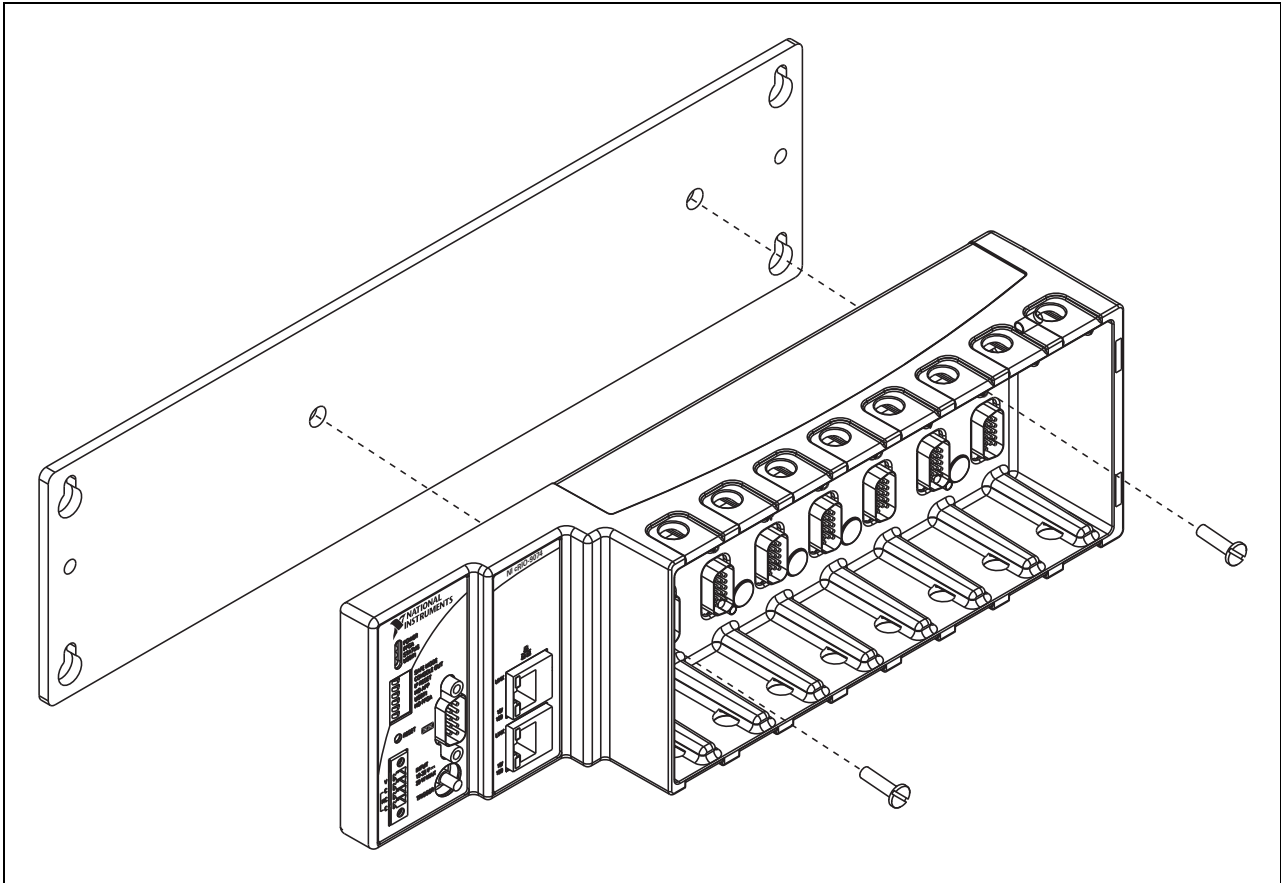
Installing the Panel Mount Accessory on the cRIO-9072/3/4
